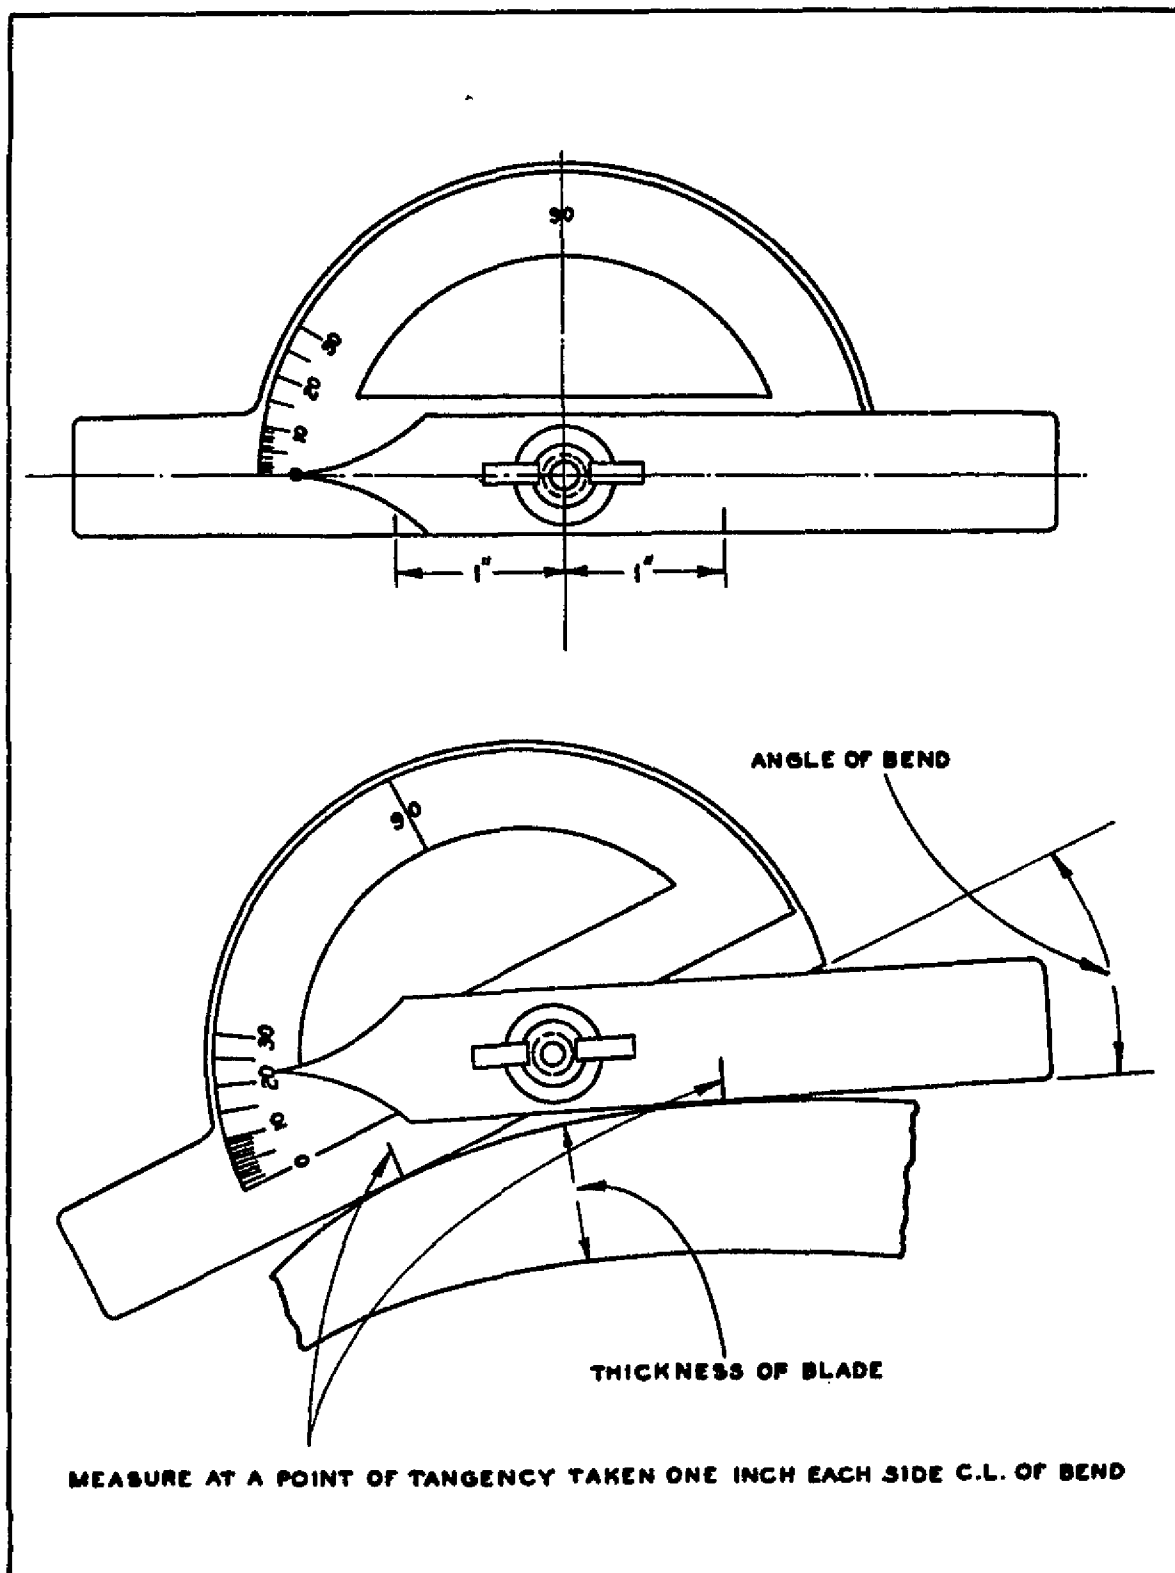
Protractor and method of measuring angle of bend in aluminum alloy propellers.
